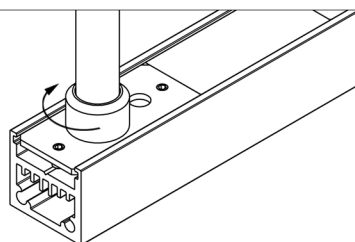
ENSURE EXTRUSION IS CLAMPED TIGHTLY
